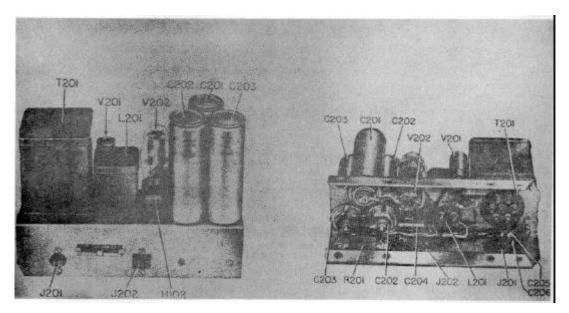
Top and Bottom Views of the Power Supply PP-562A/Urm-25.
